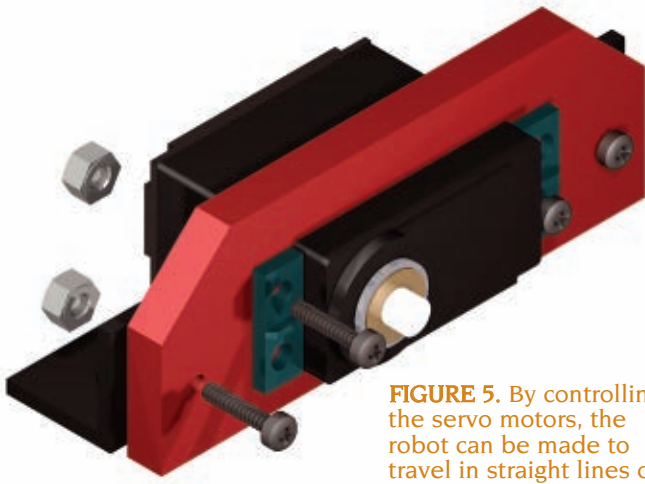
By controlling the servo motors, the robot can be made to travel in straight lines or make turns. By reversing the motors relative to one another, the robot will spin in place.
